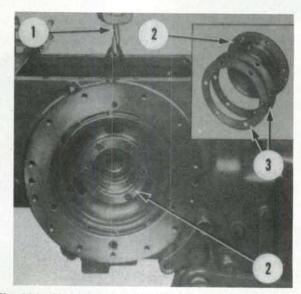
Use a sling and hoist (1) to support differential assembly. Be sure to keep shims (3) separate and identified with the bearing carriers (2) for correct reassembly.
